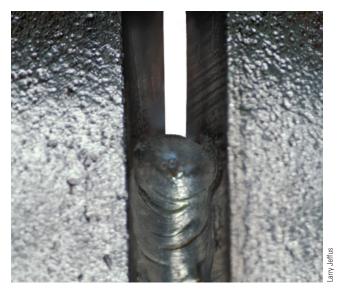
Good stopping point for a weld that will be restarted.
